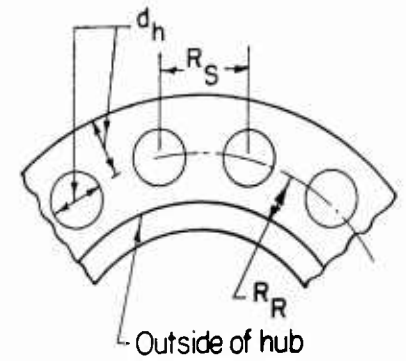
BOLTED-FLANGED CONNECTION WITH FULL-FACE GASKET
